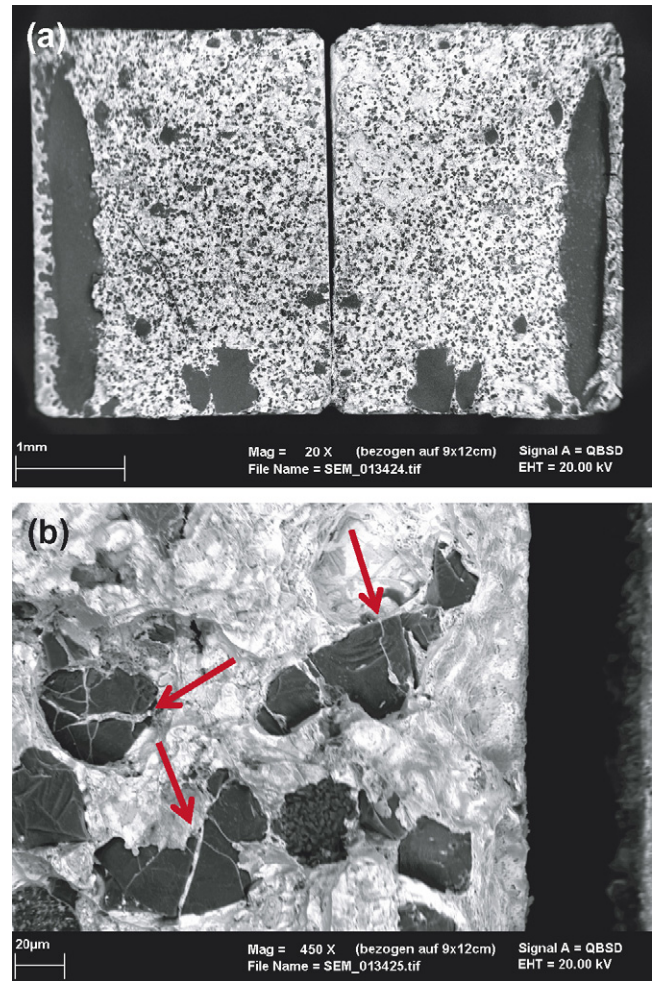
Ceramic to steel joint brazed with Incusil ABA + 10 vol.% SiC tested at 250 °C: (a) fracture surfaces showing failure through the composite braze and (b) individual SiC particles have been fractured during brazing and the resulting cracks filled with braze alloy (arrowed).
